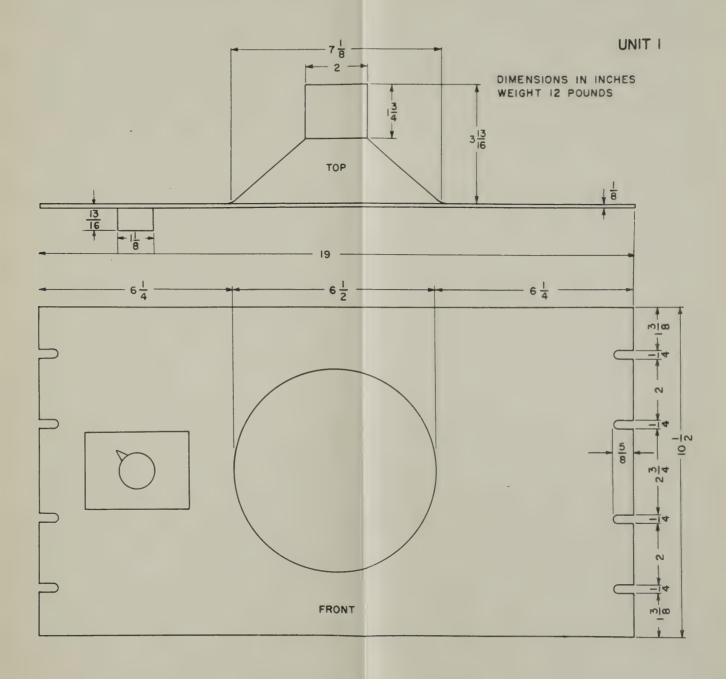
Loudspeaker LS–187/UR, Outline Dimensions
